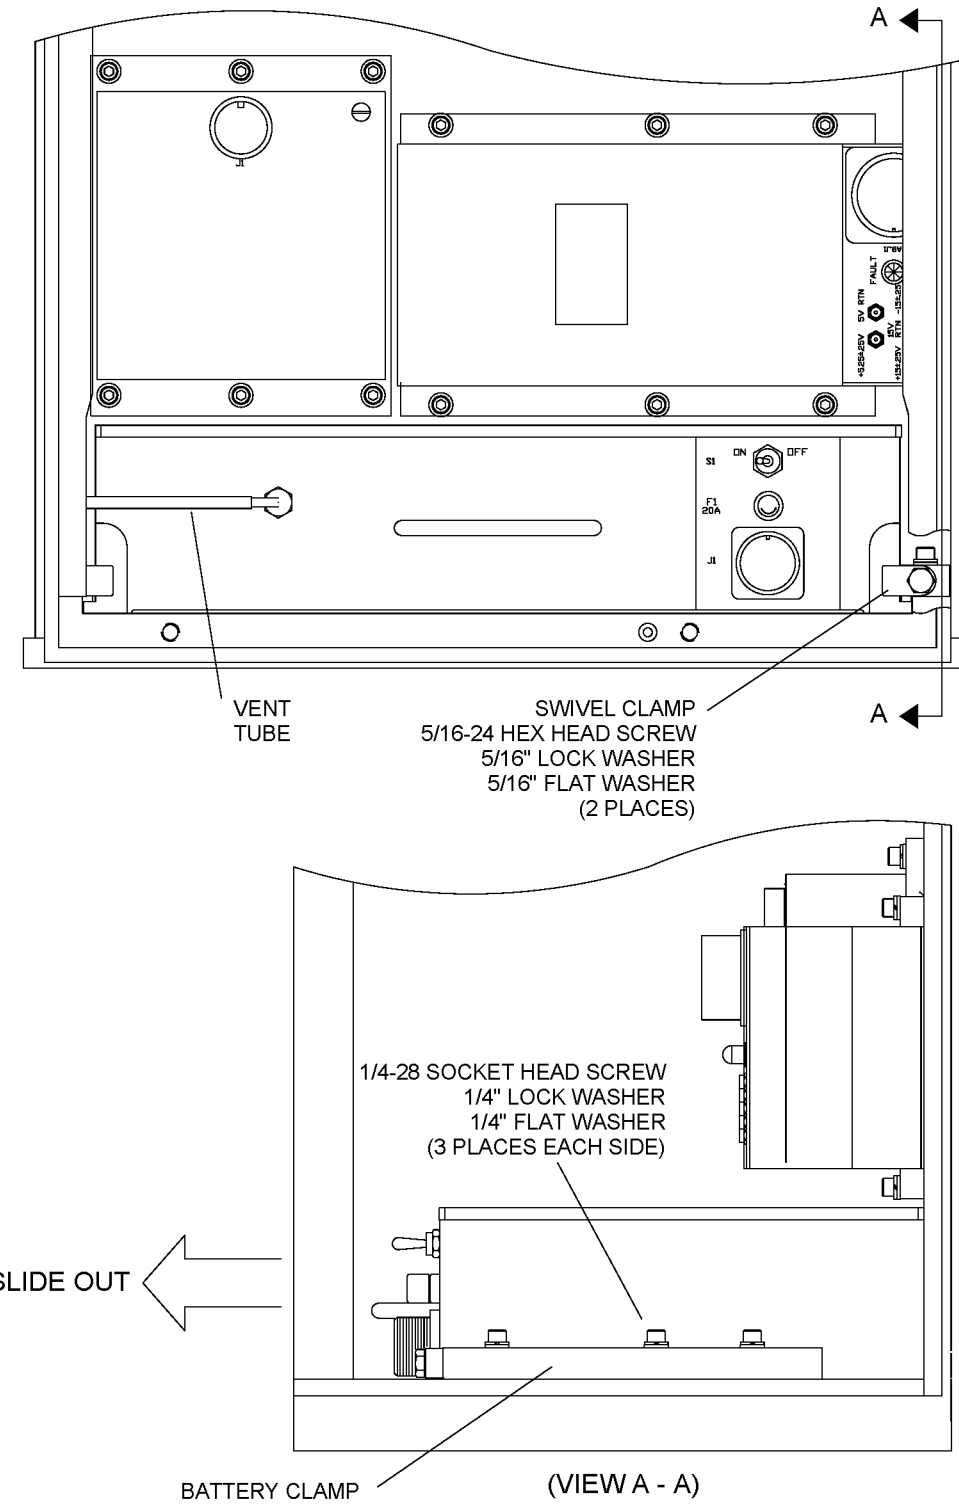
Replacement of Battery Assembly (1A1A5)
